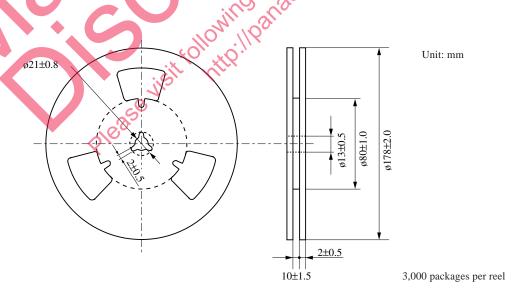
Embossed Taping Reel Dimensions for Mini Type Package
